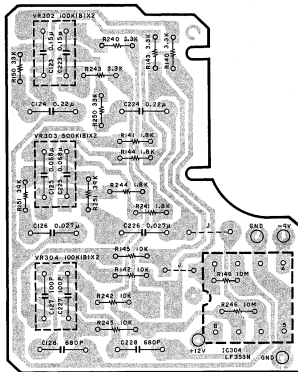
C60503551 - (TD-700 & TD-700E)
